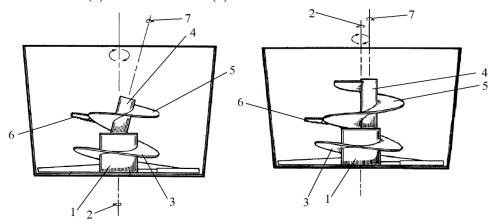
Auger design with asymmetric flight arrangement by «Kuhn» [19]:1 – lower core; 2 – rotation axis of the lower core; 3 – lower flight; 4 – upper core; 5 – upper flight; 6 – knife; 7 – rotation axis of the upper core
